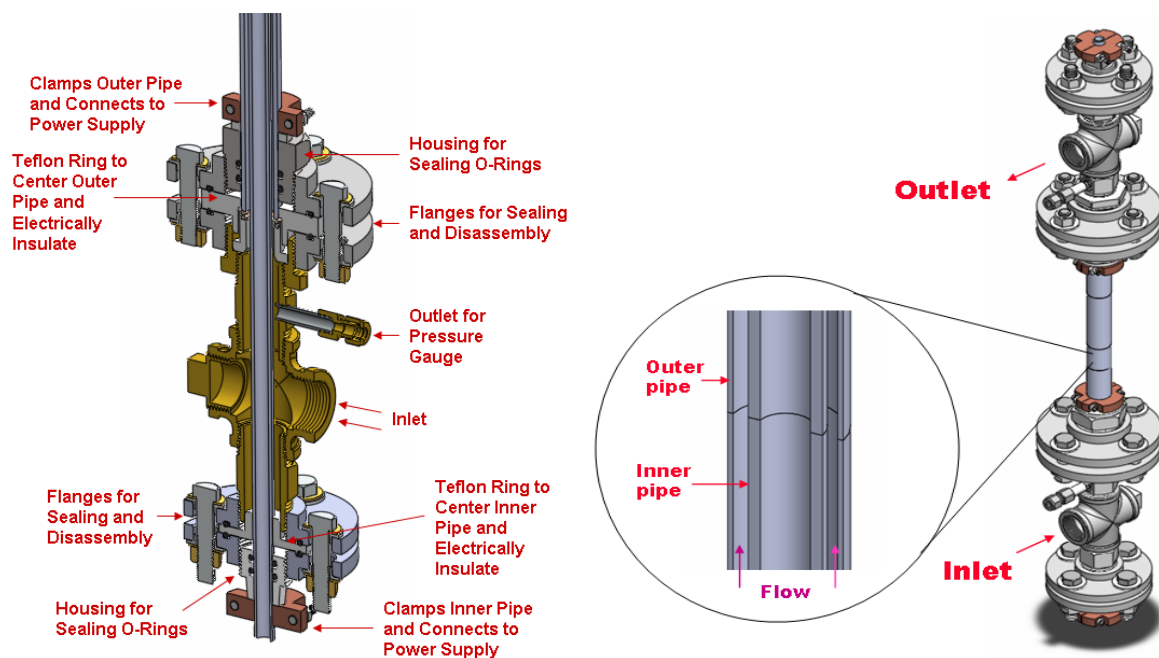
Detailed design of the annular heater element for the CIET Test Bay.
